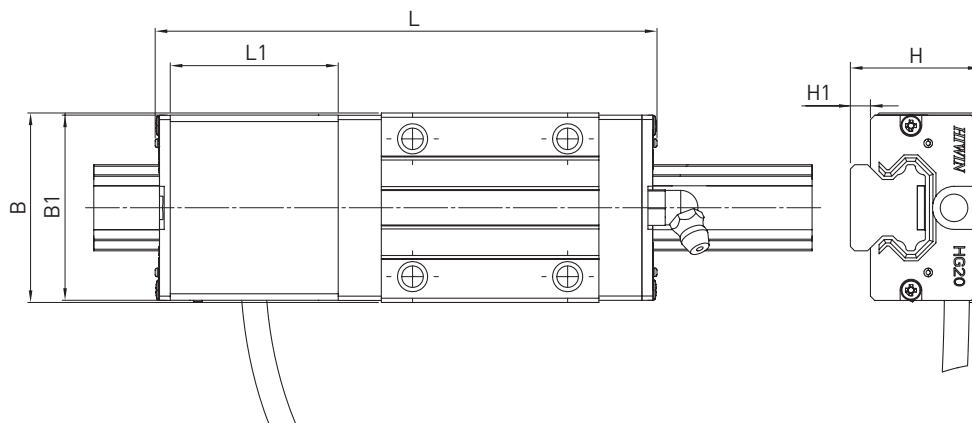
Scale drawing of the HG20CA block including the MAGIC-PG housing
